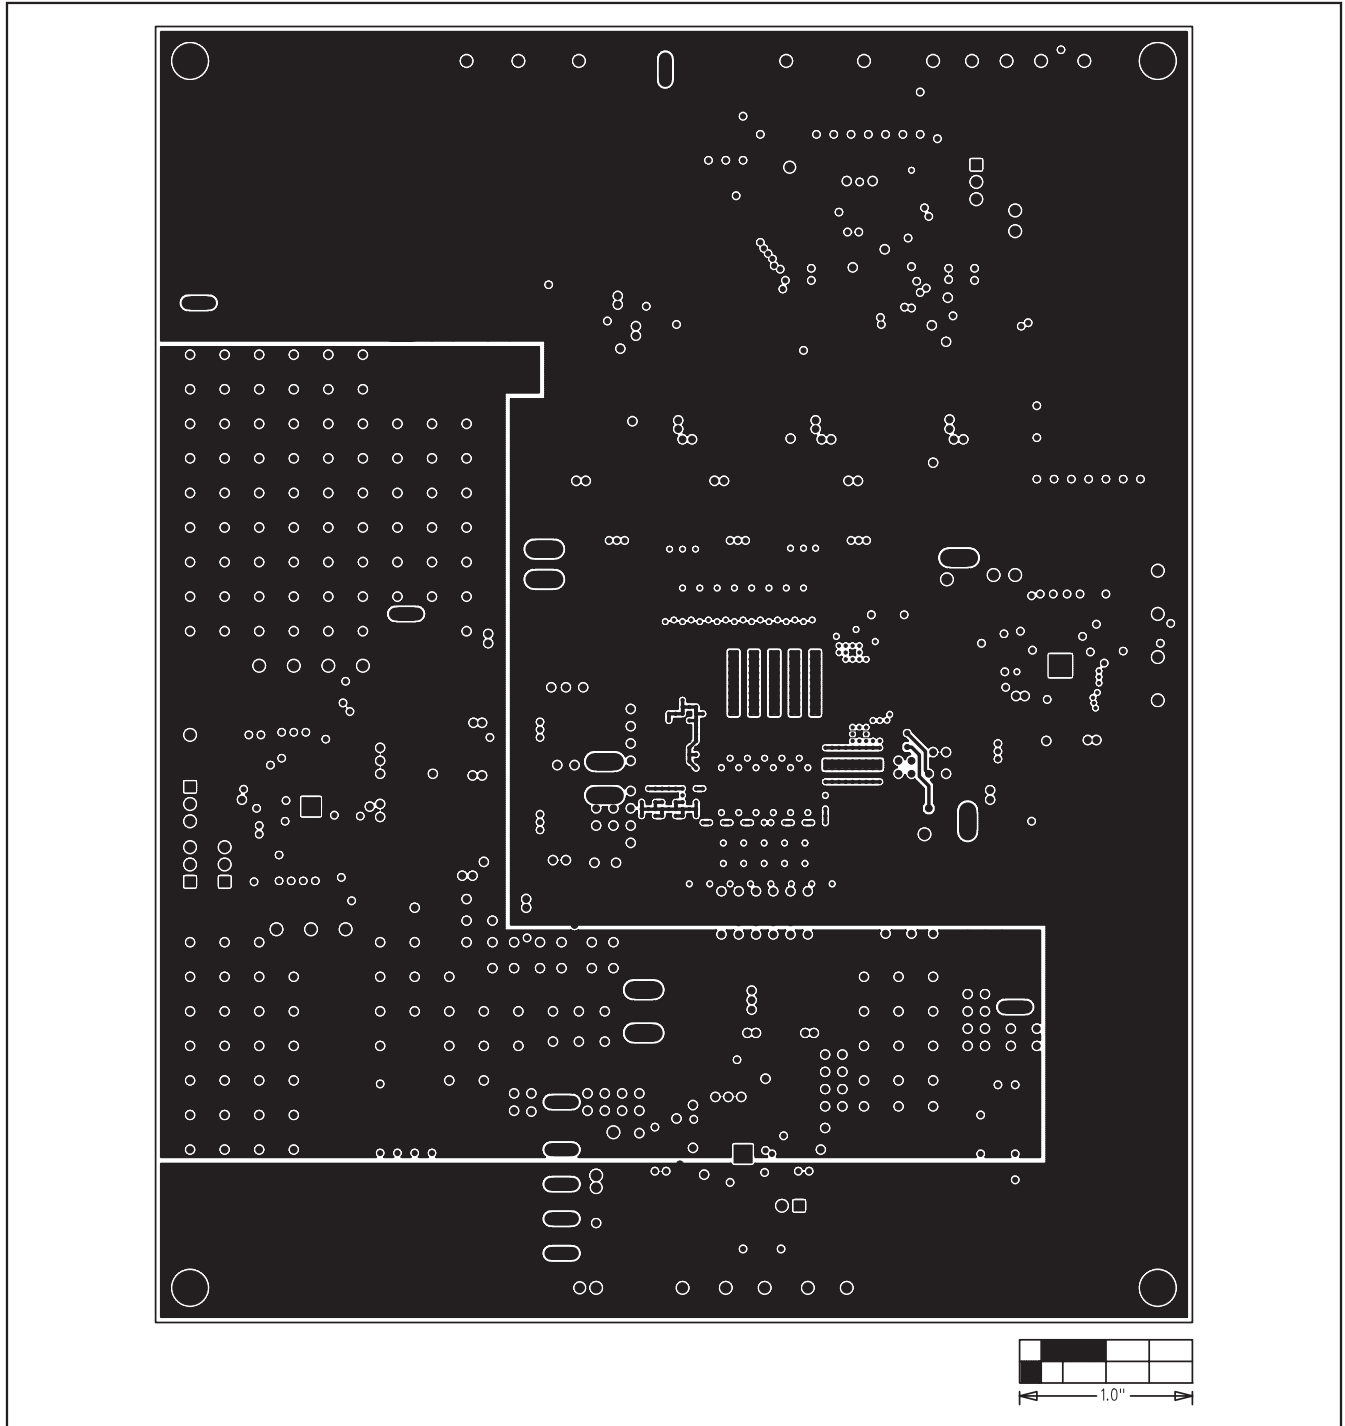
MAX17030 EV Kit PCB Layout —Internal Layer 5 (PGND Layer)
